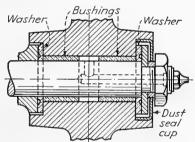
The labyrinth seal shown does not rely on nonmetallic materials but on the small clearances with the assembly. A steel washer contacting a bronze thrust washer is clamped against the shaft shoulder after the formed dust seal cup is pressed into the counterbored hole.
